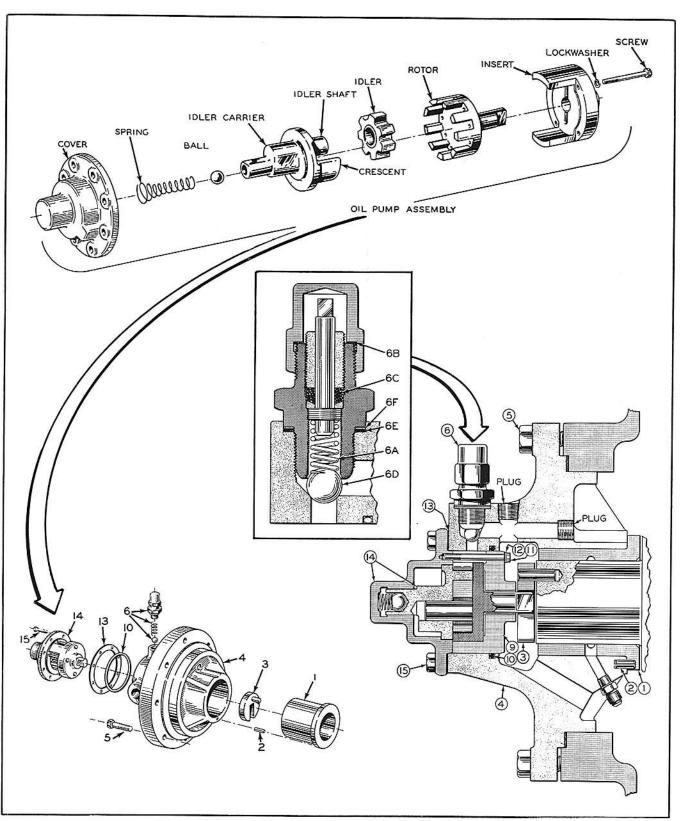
Main Bearing Head and Oil Pump Assembly
